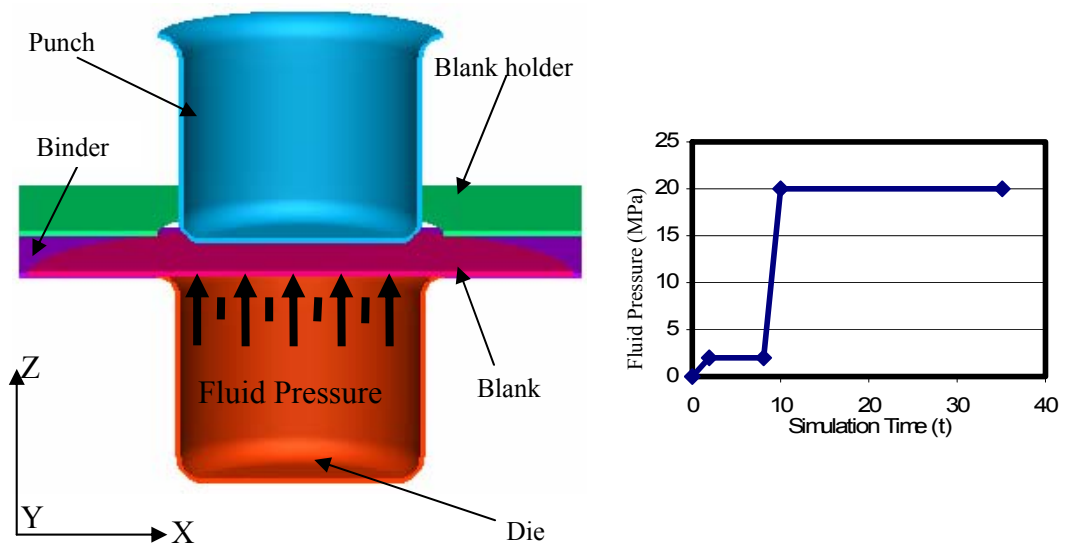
Hydro-mechanical deep drawing (aquadrawing) process setup and counter pressure exerted by fluid on to the workpiece
